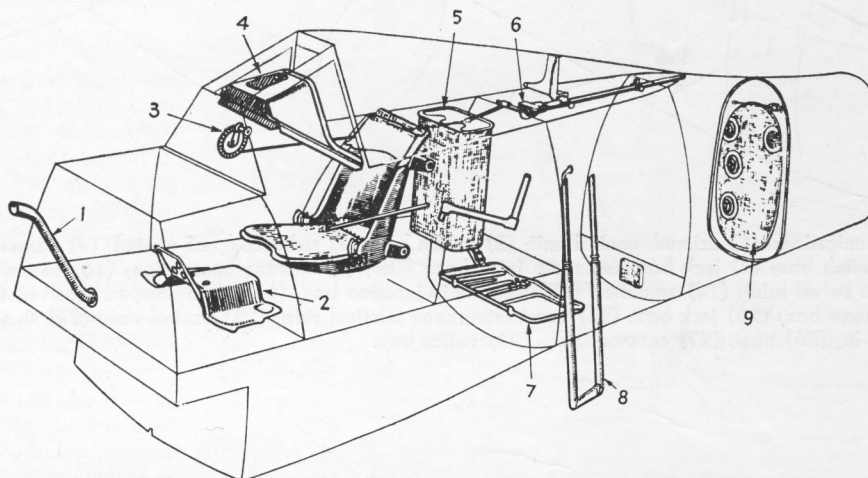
Accessories in the FW-190 fuselage section: (1) hot-air supply to cockpit; (2) cover over fuel pumps and electric junction boxes; (3) handle moving canopy; (4) armor and bulletproof glass; (5) battery; (6) explosive canopy release; (7) camera mount; (8) step which telescopes up into the fuselage; (9) fabric panel in bulkhead 12 to protect instruments located in the aft fuselage section.
